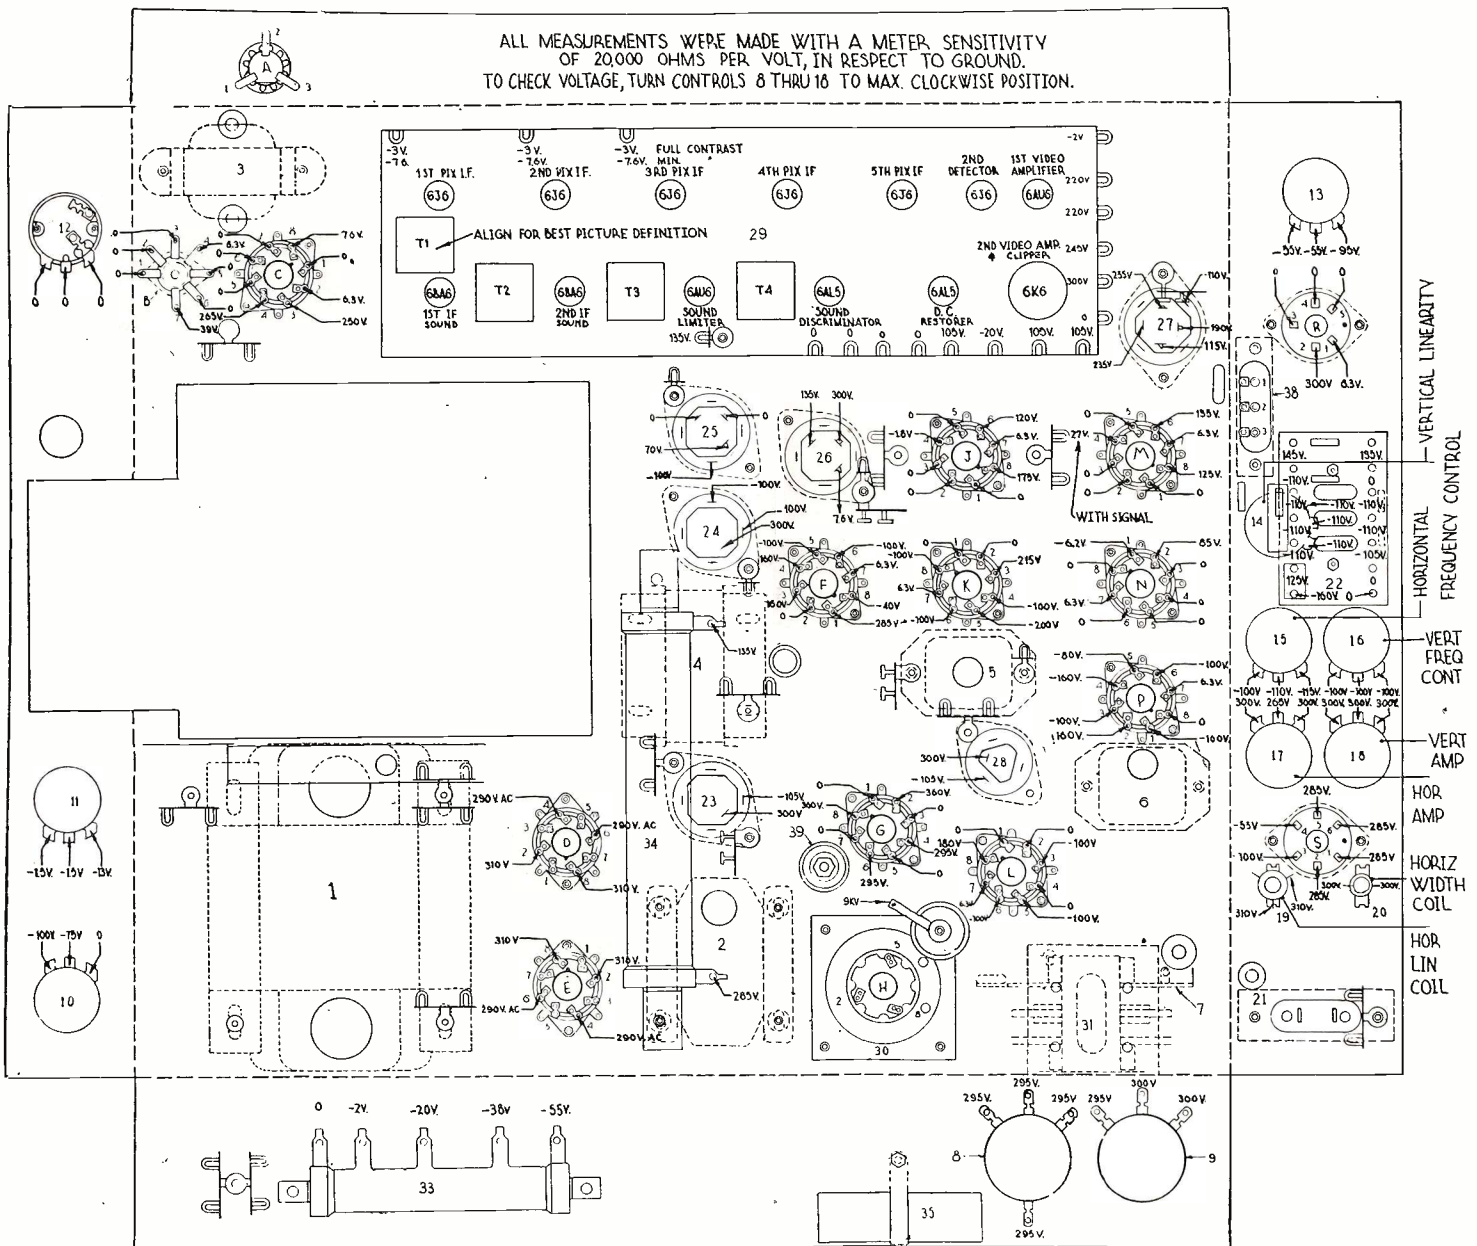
Voltage chart and parts placement of Television Assembly kit.
